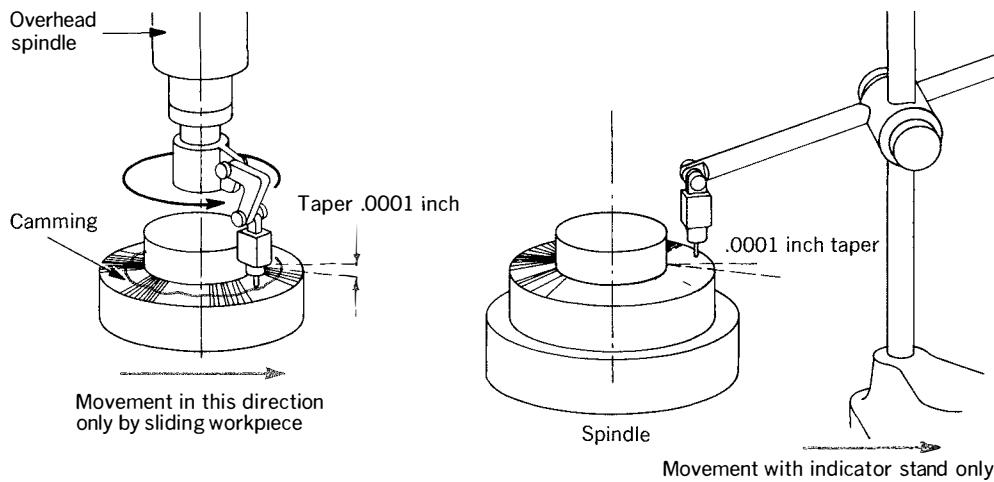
(bottom, left) Neither the overhead spindle nor the rotating table spindle, by themselves will reveal taper in the specimen.
